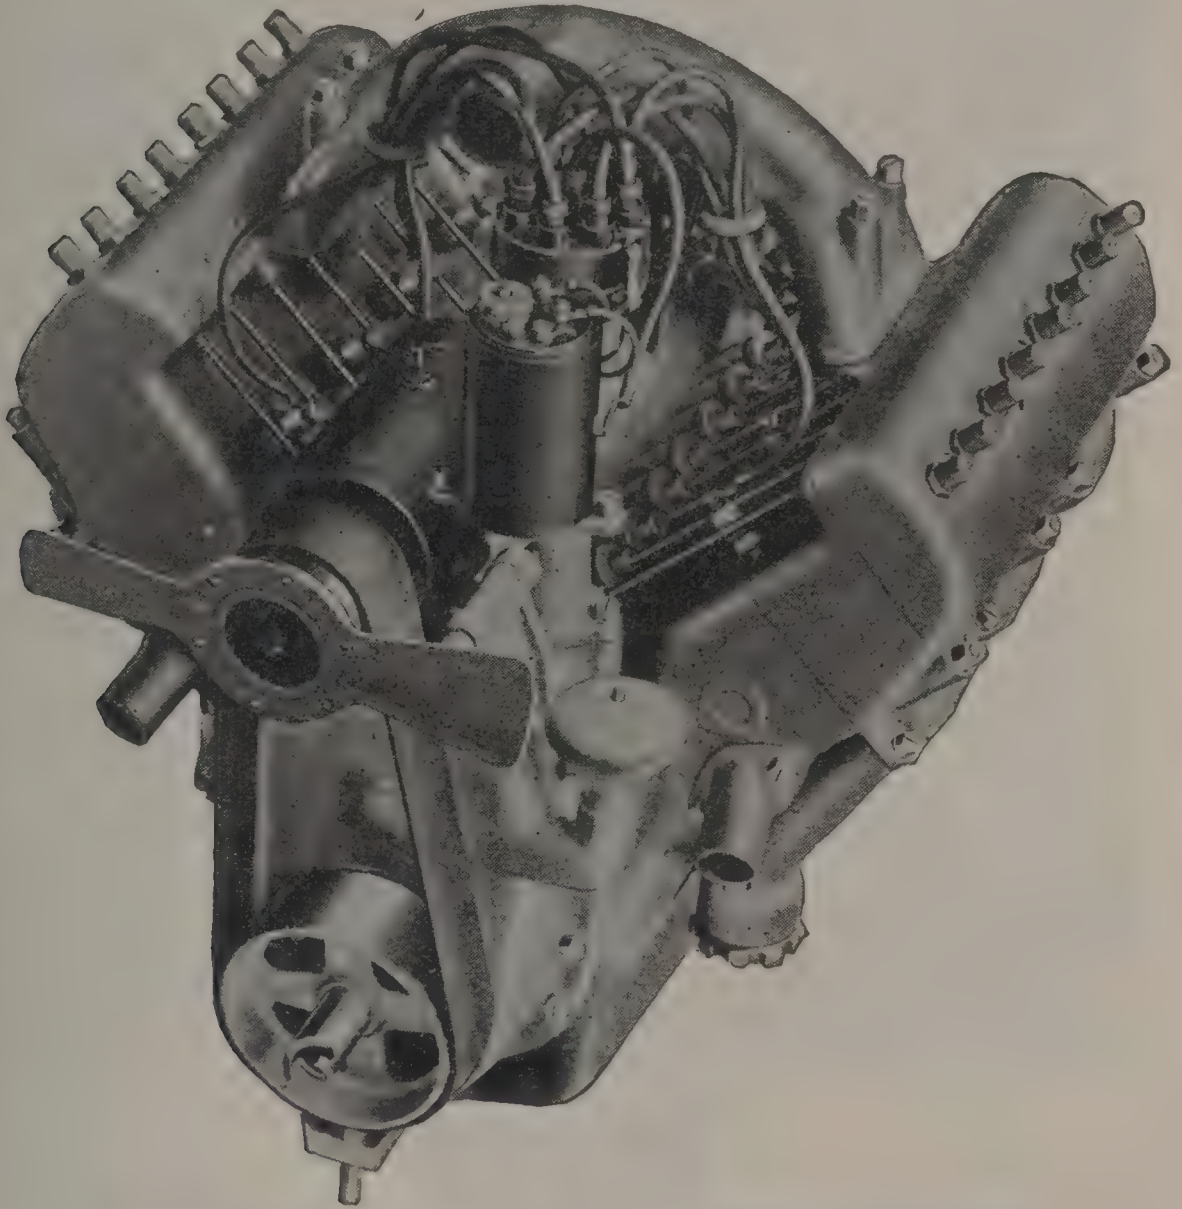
Belt-driven generator as installed on a Ferro eight-cylinder engine
